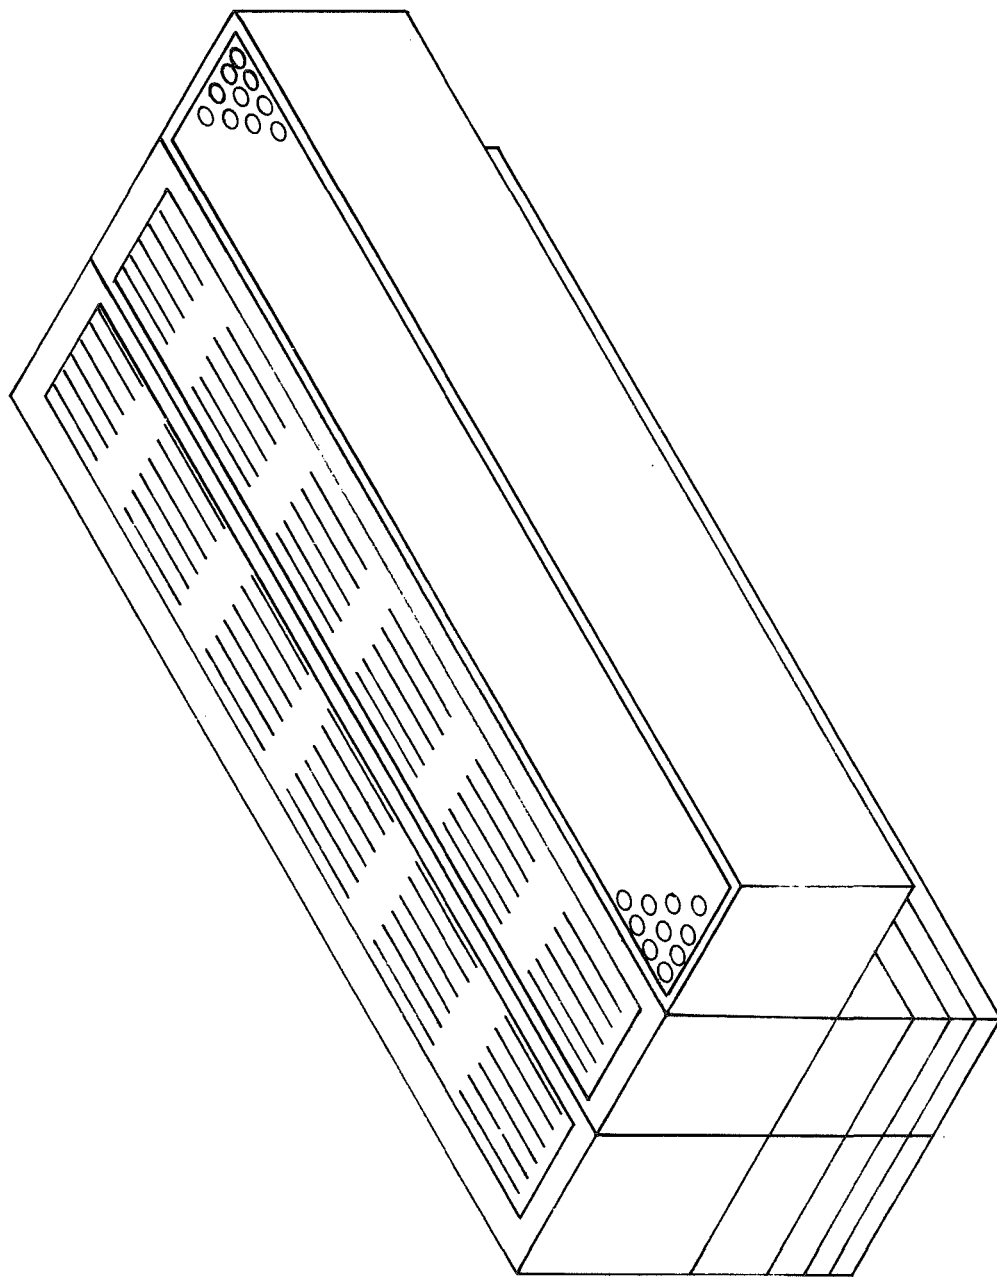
Bragg Crystal Collimator Construction Arrangement
